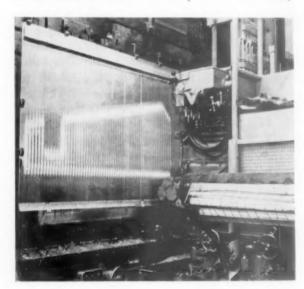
When the sheet is held in a vertical position as shown here, the chip removal problem is easily solved.
